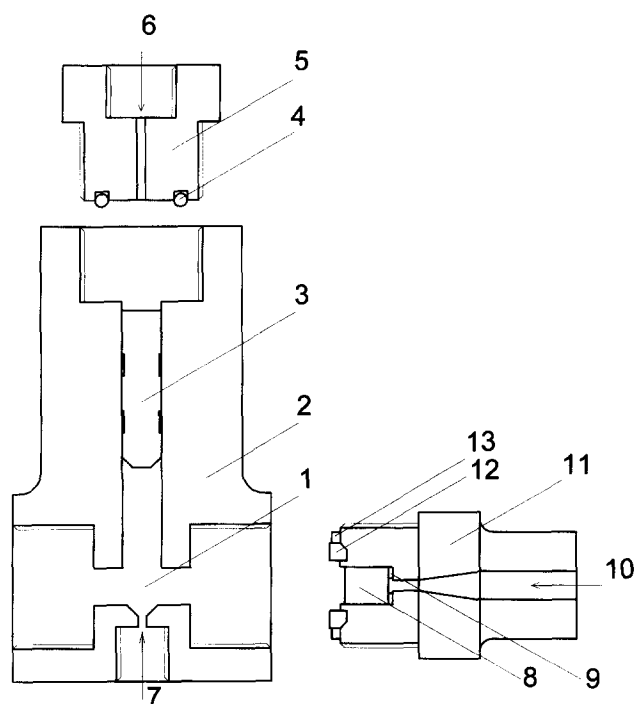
Exploded view of the high pressure optical cell. (1) Main chamber. (2) Main body. (3) PTFE piston. (4) O-ring seal. (5) Top flange. (6) High pressure oil inlet. (7) Carbon dioxide inlet. (8) Sapphire window. (9) PTFE seal. (10) Optical path. (11) Window holder. (12) PTFE seal. (13) Phosphor-bronze ring. Two identical window holder assemblies (11) are screwed into the opposite sides of the main body (2)
